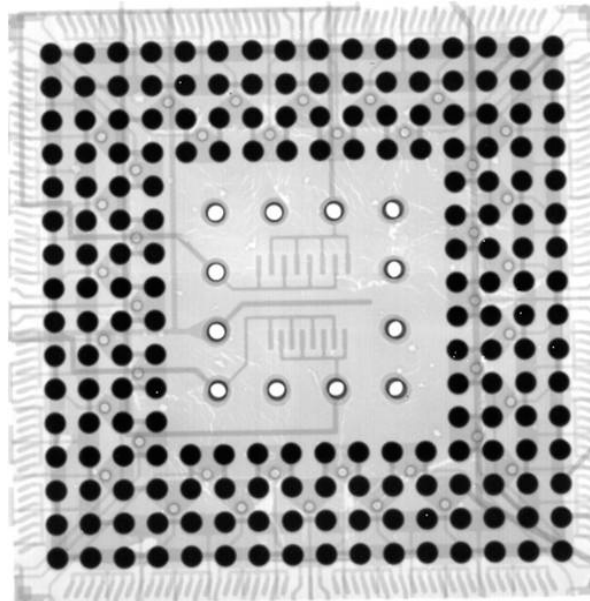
Solder ball layout of the BGA package under X-ray.
